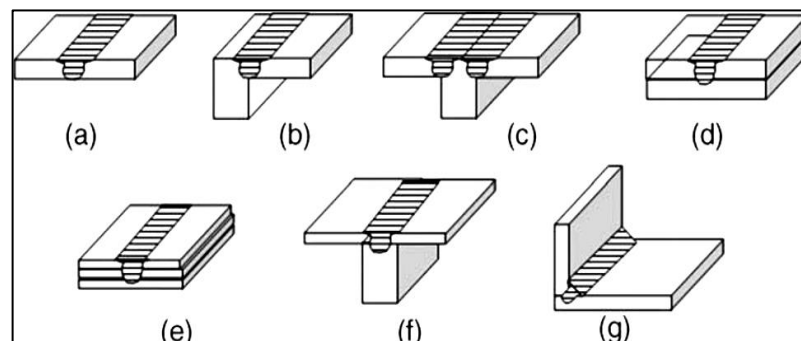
A few of FSW joint designs (a) butt weld (b) vertical weld (c) double side vertical weld (d, e) Weld an overlap (f) weld in a T-section (g) joint weld [41,56].
